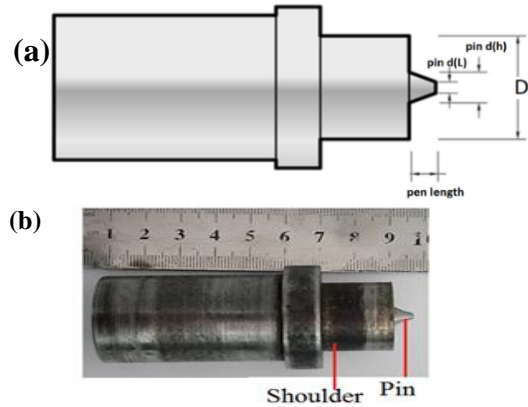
(a) a schematic illustration of the tool dimensions, (b) A photograph of the machined tool used in FSW experiments
